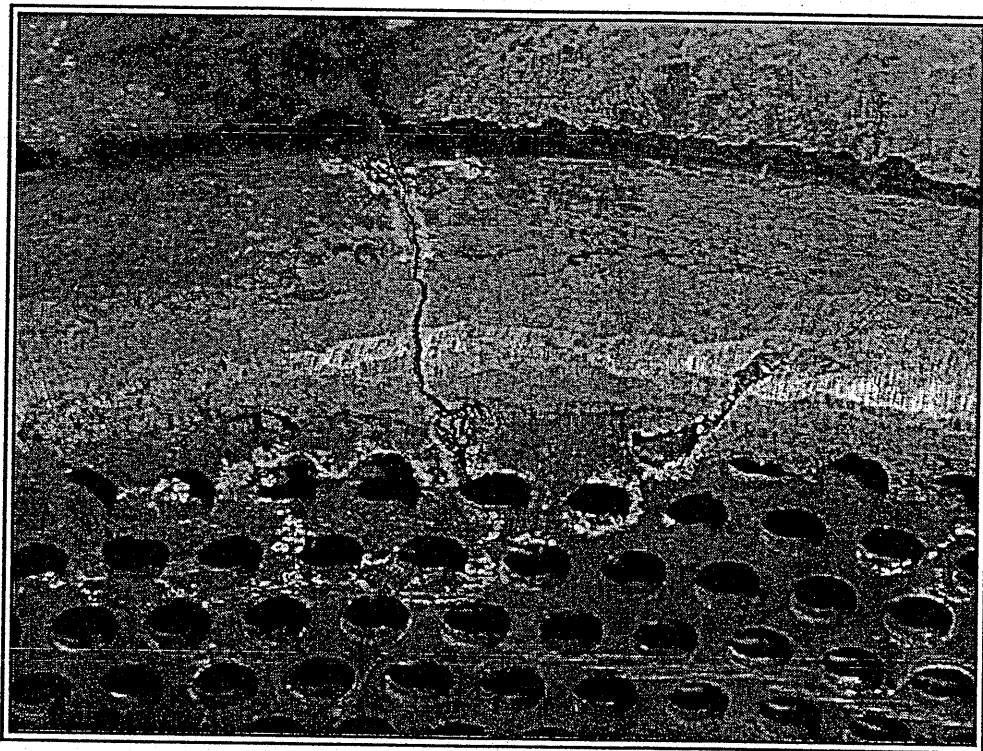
Photograph of the flange cracks in the witch's hat strainer
